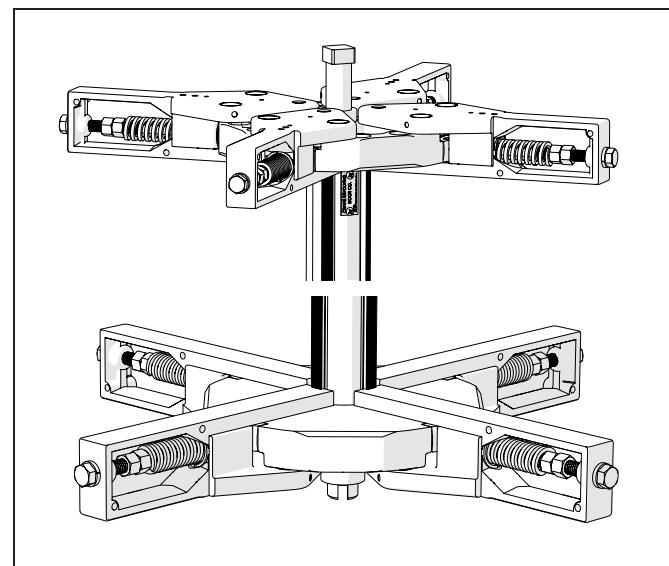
Center shaft top and bottom hangar assemblies
